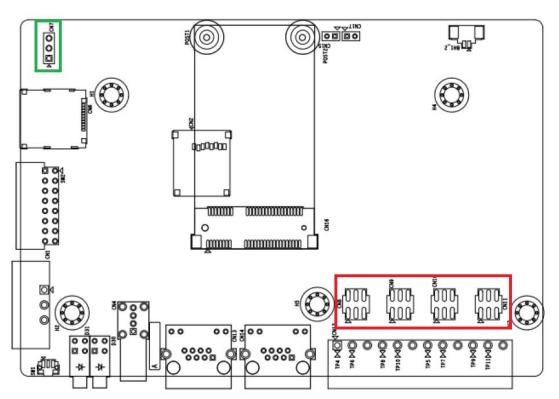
ECU-1251 Jumper on the Back Motherboard
